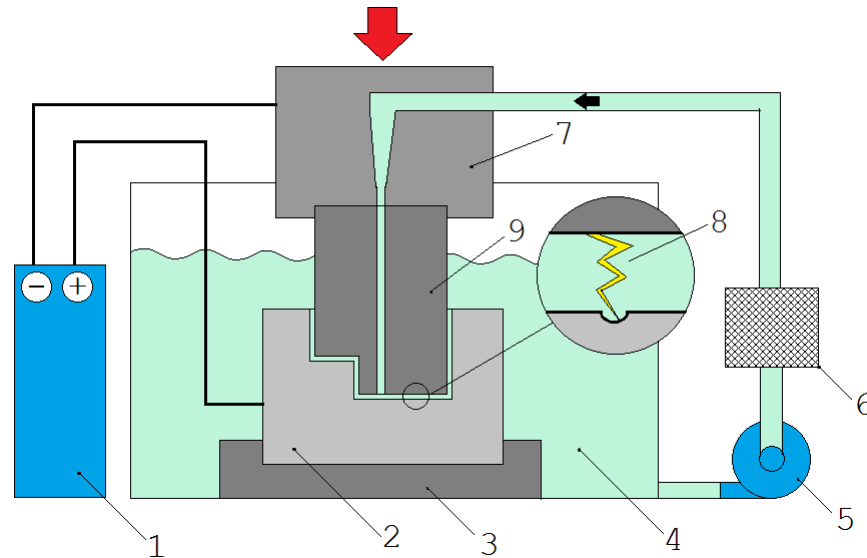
A schematic of the EDM process. 1 Pulse generator (DC), 2 Workpiece, 3 Fixture, 4 Dielectric fluid, 5 Pump, 6 Filter, 7 Tool holder, 8 Spark, 9 Tool. Image source: *"Electrical Discharging Machining scheme"* by Frank50 licensed under CC BY-SA 4.0
